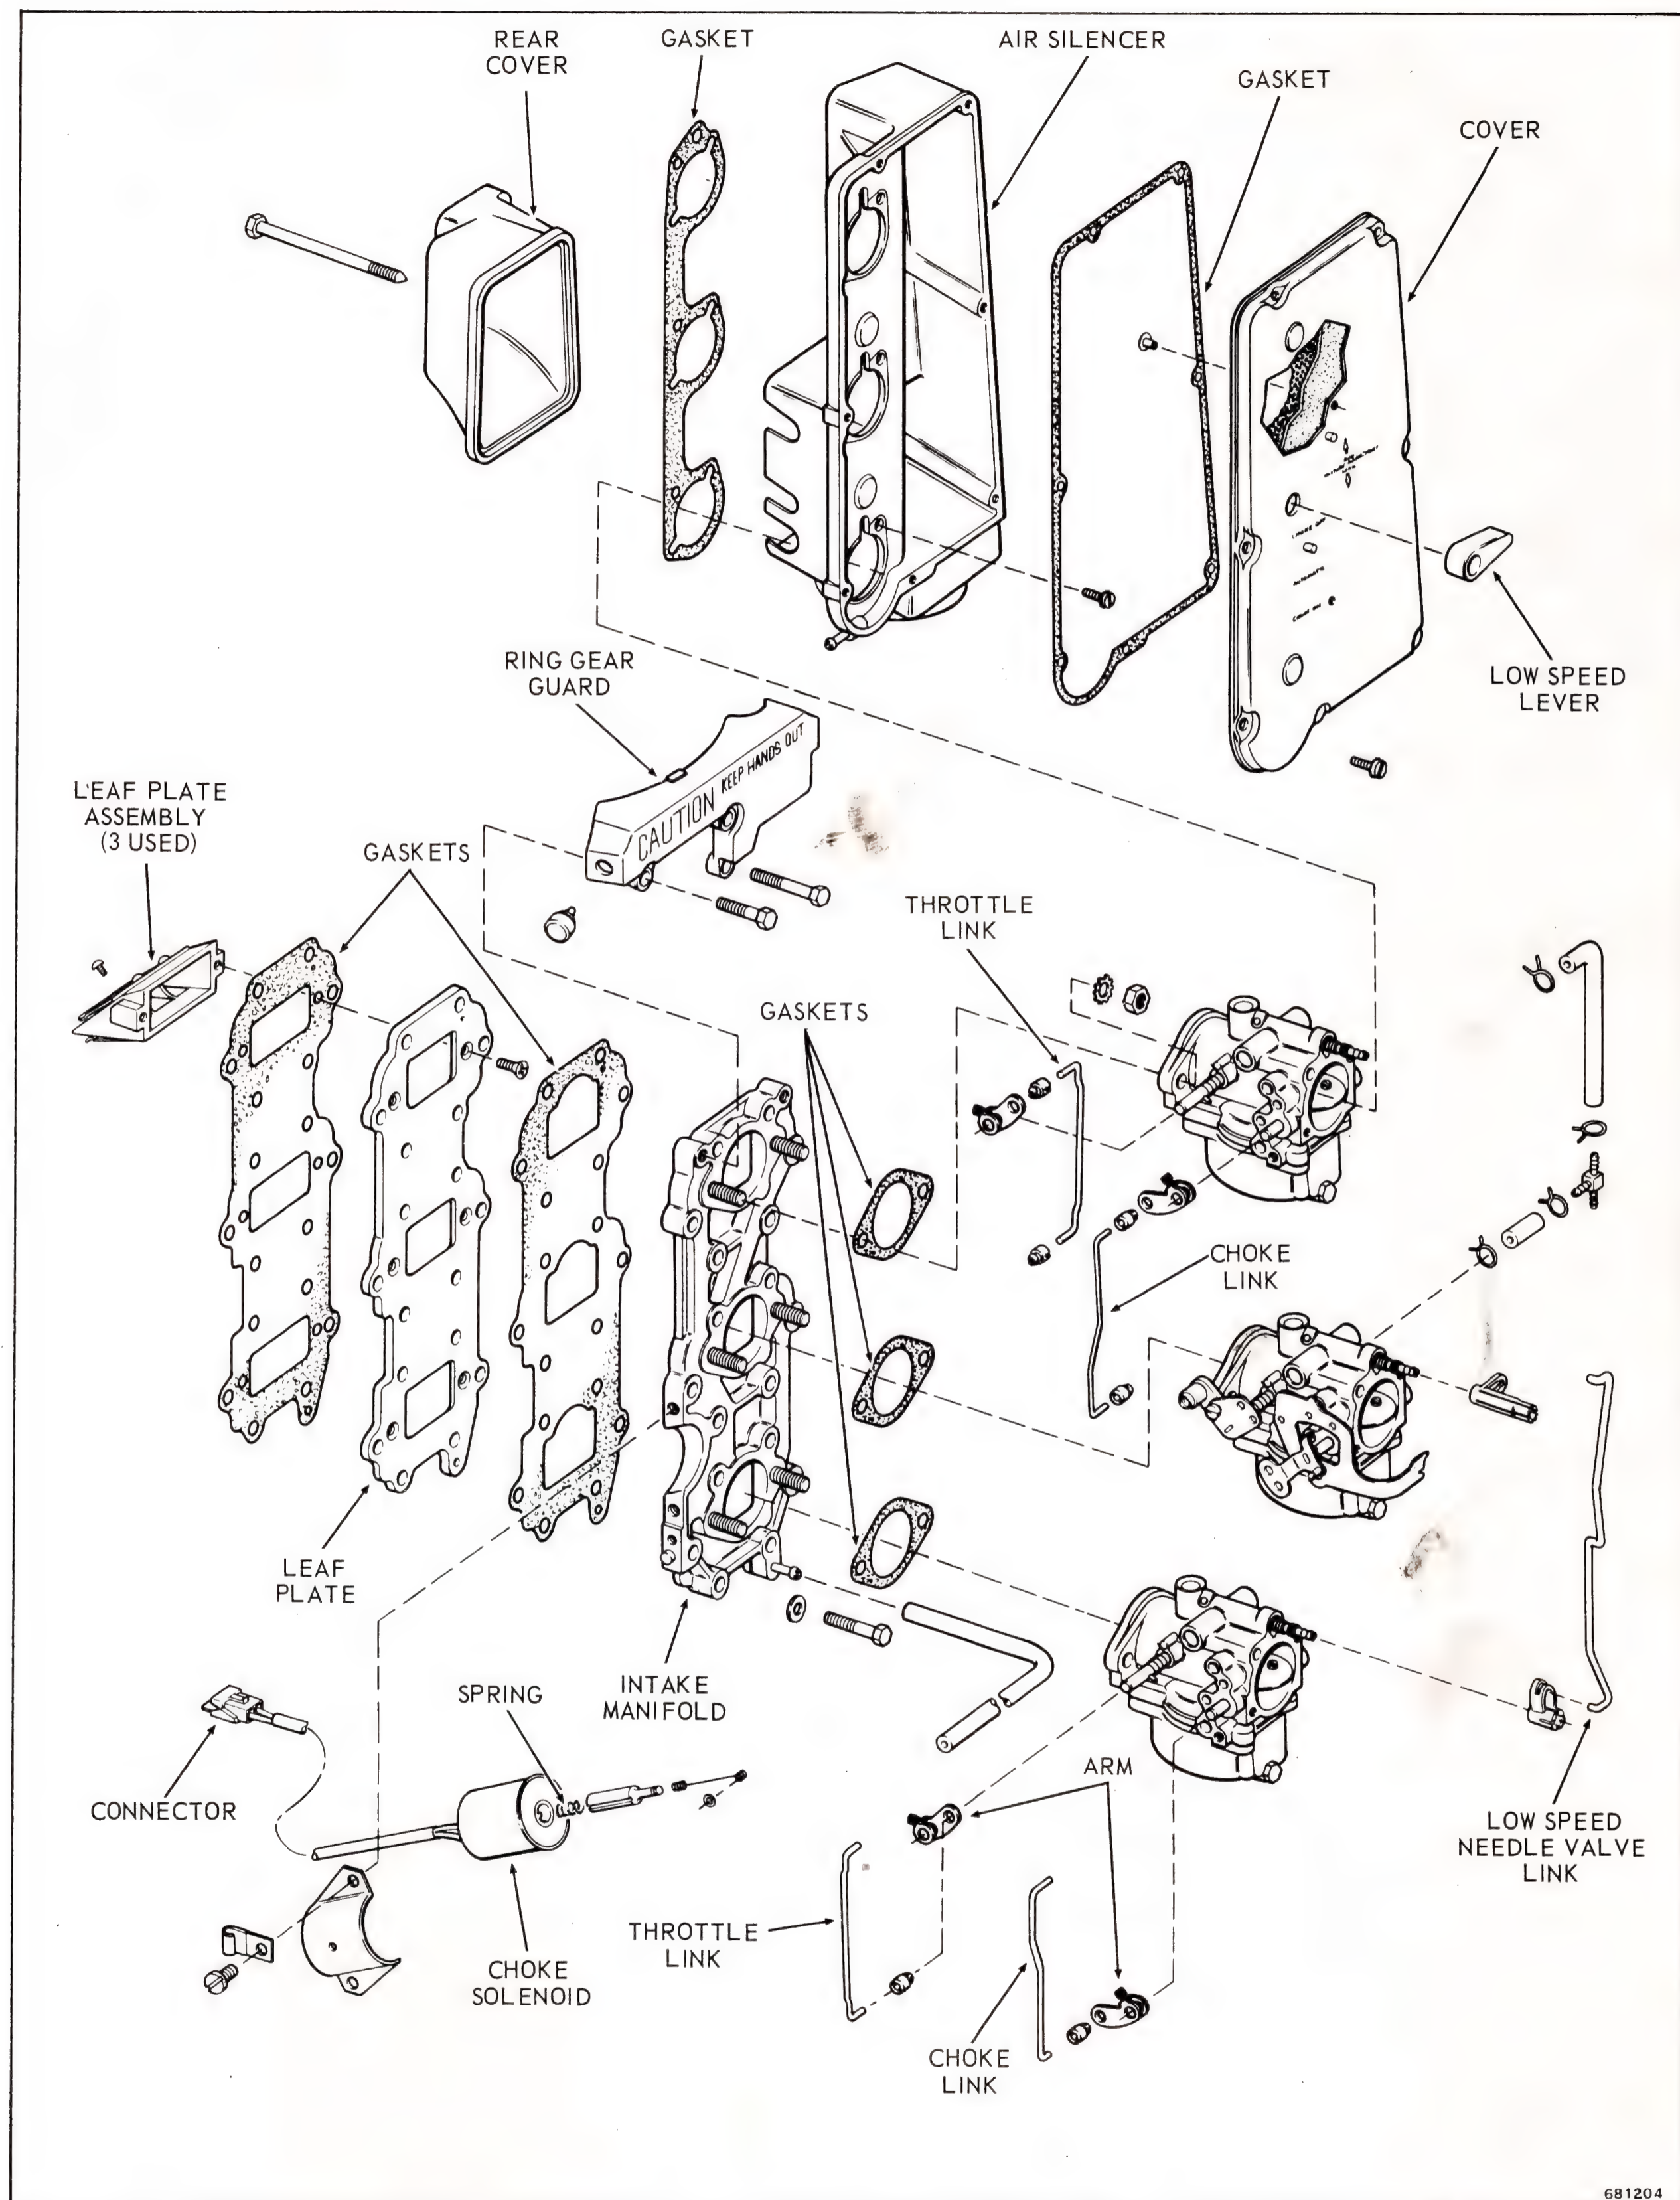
Air Silencer, Carburetors, Intake Manifold, and Leaf Valves
